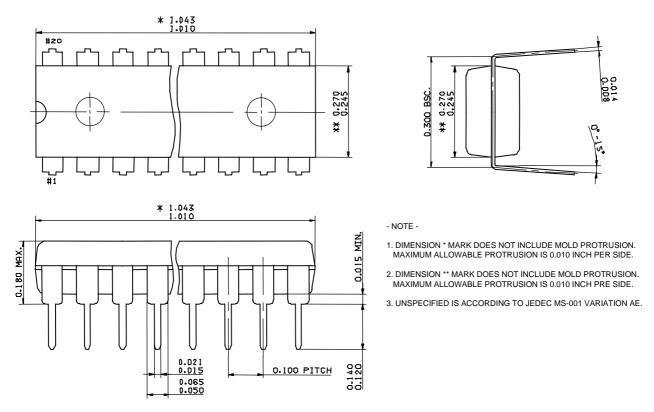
20PDIP (300MIL) Pin Dimension (UNIT: INCH)
